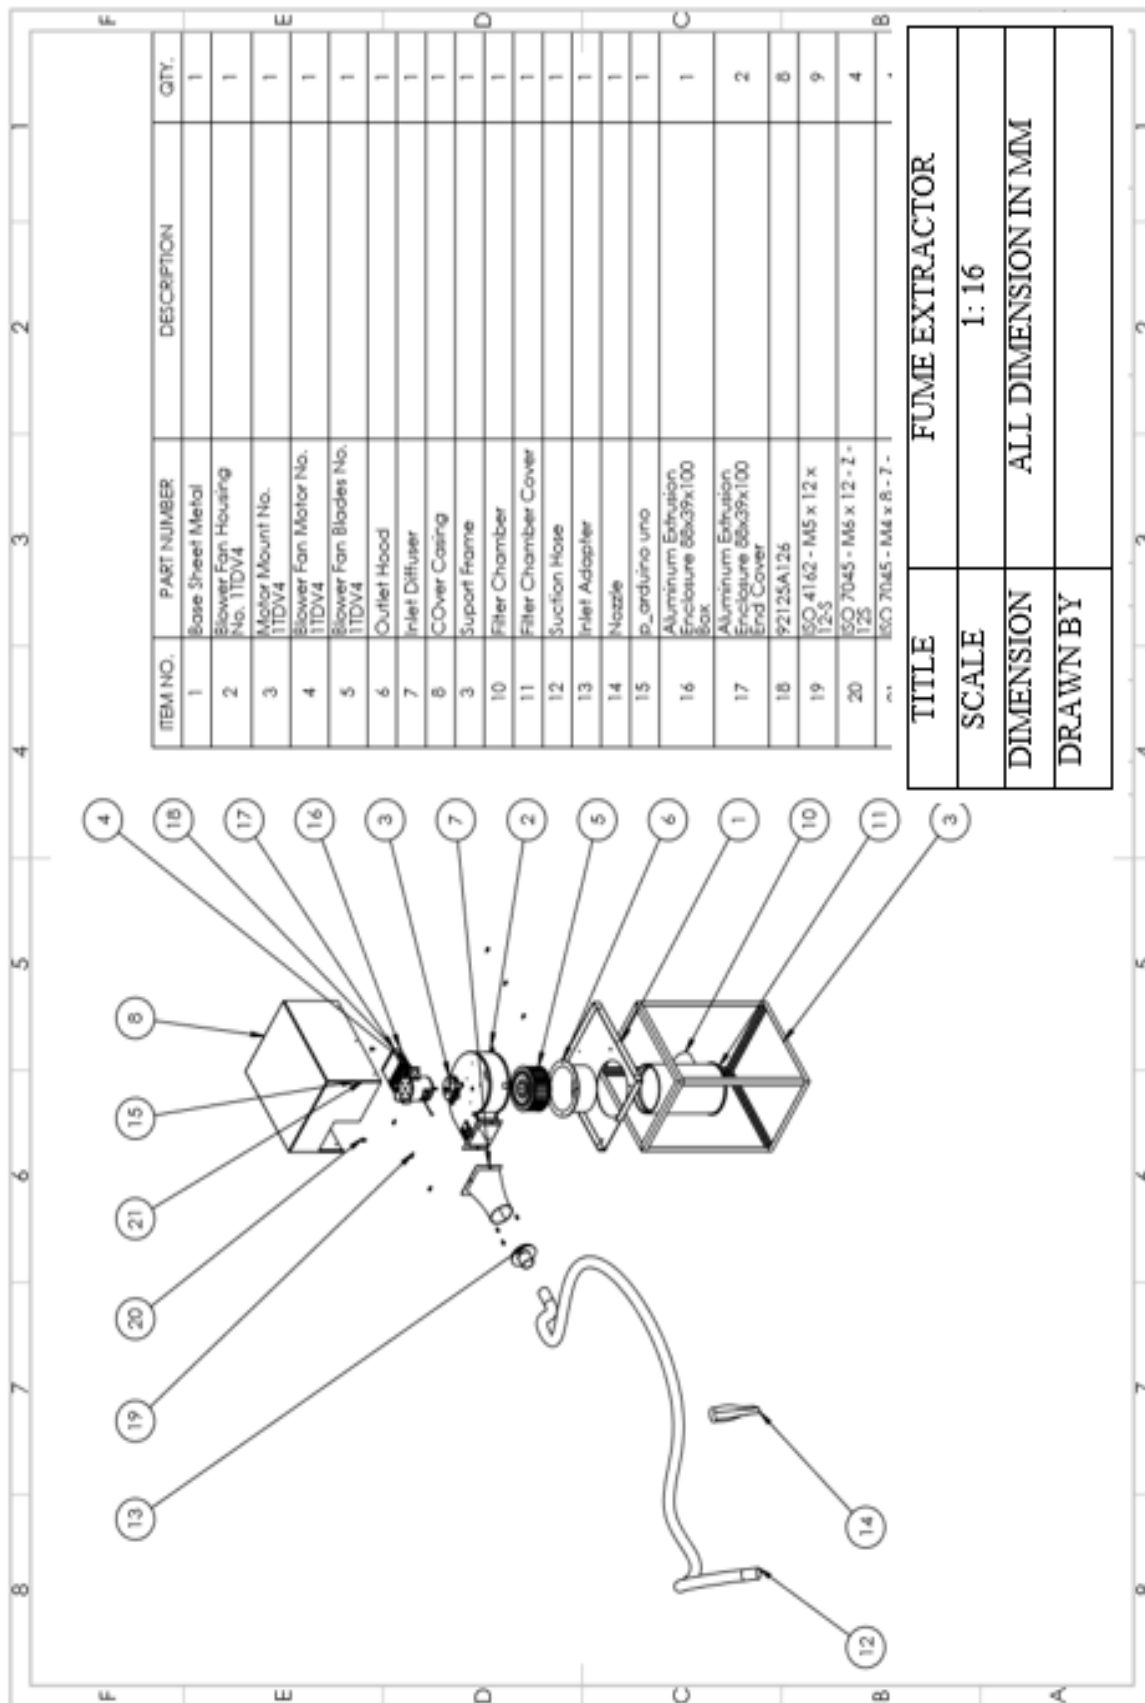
Conceptual Design Model Showing the Exploded View of the Automatic Fume Extractor.
